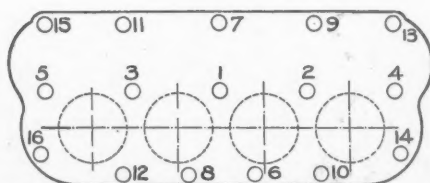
Diagram, Showing Proper Order of Tightening Cylinder Head Nuts on Studs
